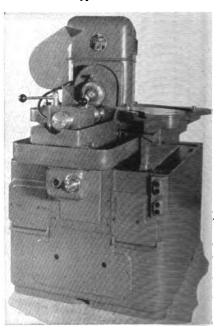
No. 8 Enveloping Gear Generator for finishing spur and helical external and internal gears.
